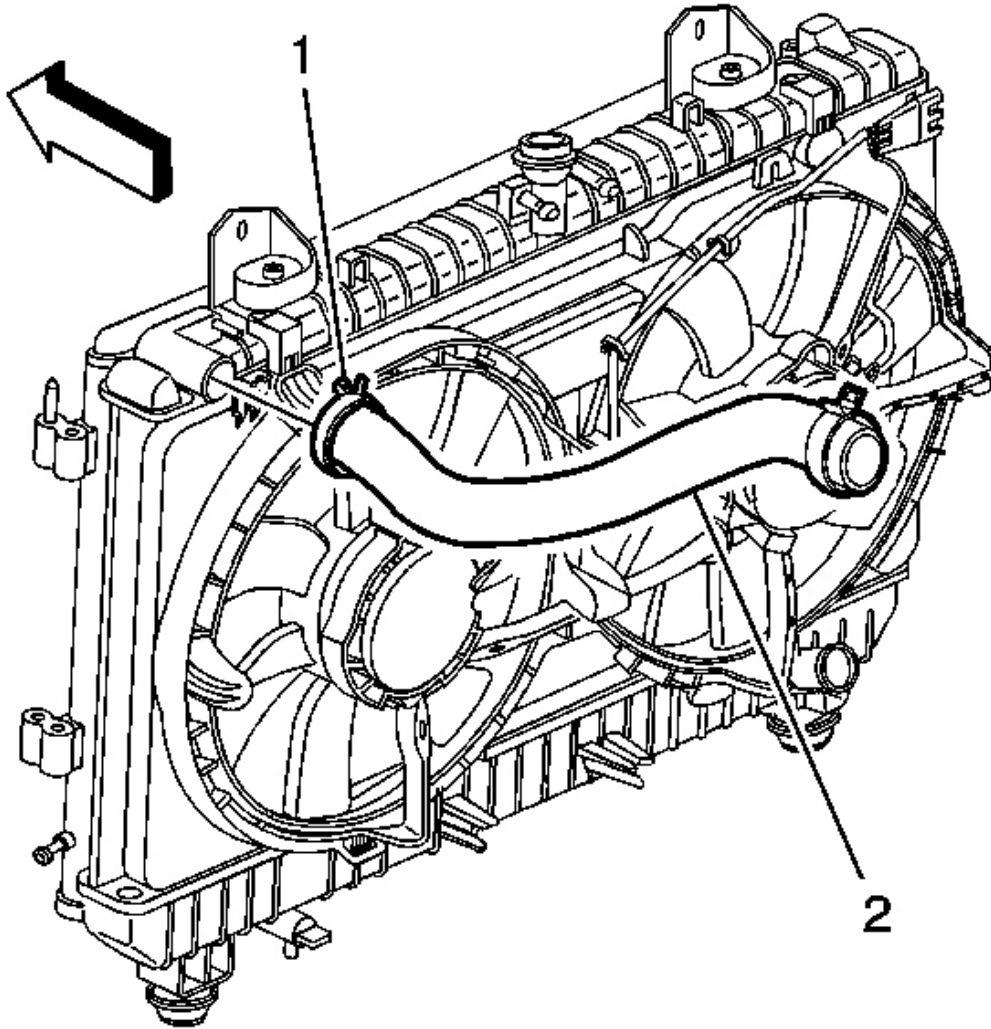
Radiator Inlet Hose & Clamp At Radiator
